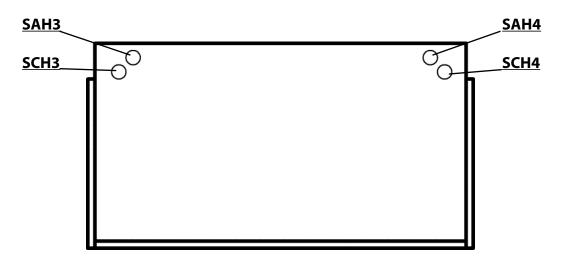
Metal Battery Holder Hole Labels (Overhead View)
